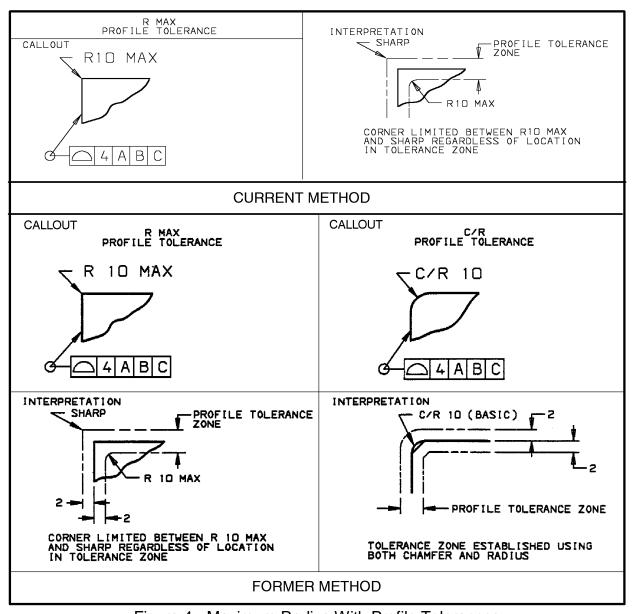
Maximum Radius With Profile Tolerances
